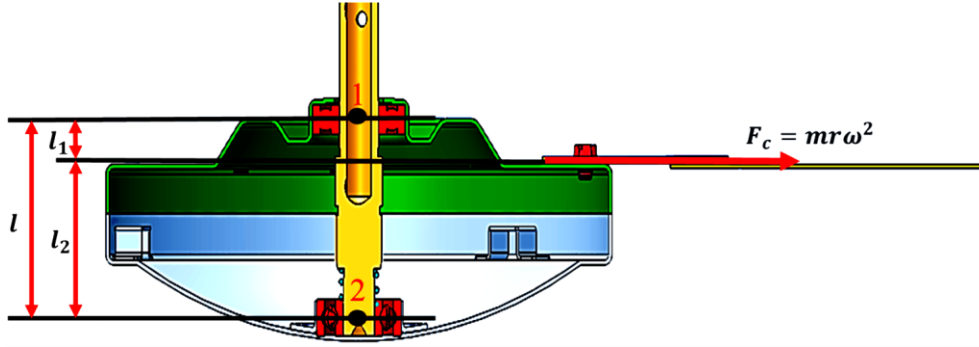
Centrifugal force acting on lower and upper bearing housing due to single blade
